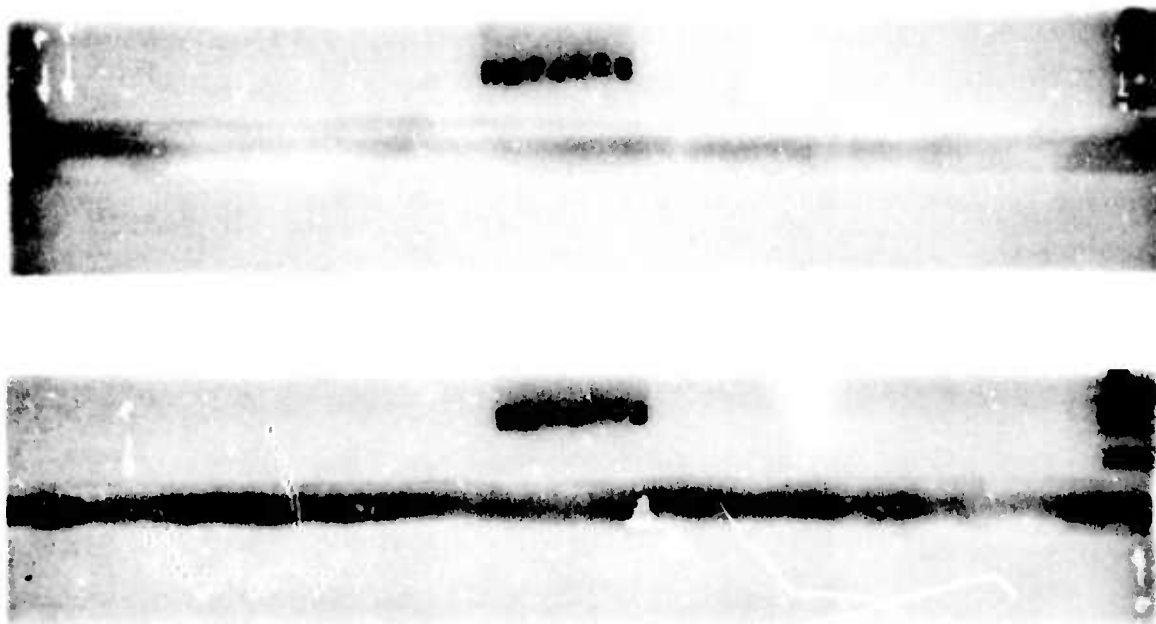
28 - Photographs of GTA weld radiographs
